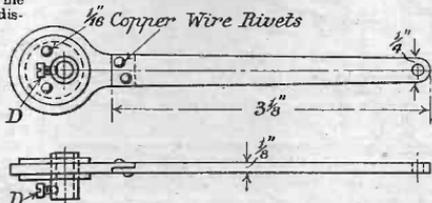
Side elevation and plan of the finished eccentric, strap and rod.
